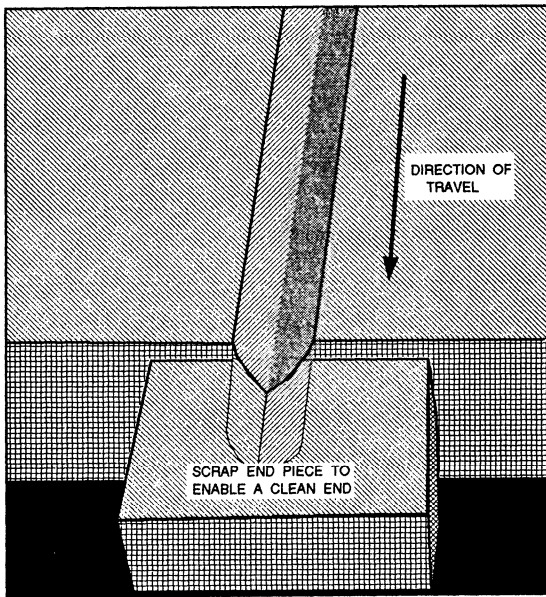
V-groove gouged in 2-inch-thick carbon steel.
